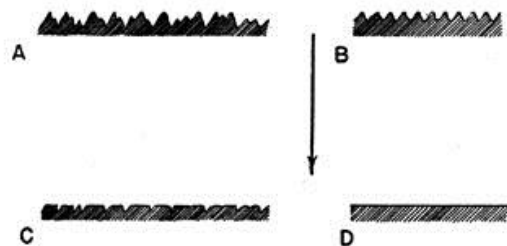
Type of surfaces obtained by burnishing (diagramatic)
